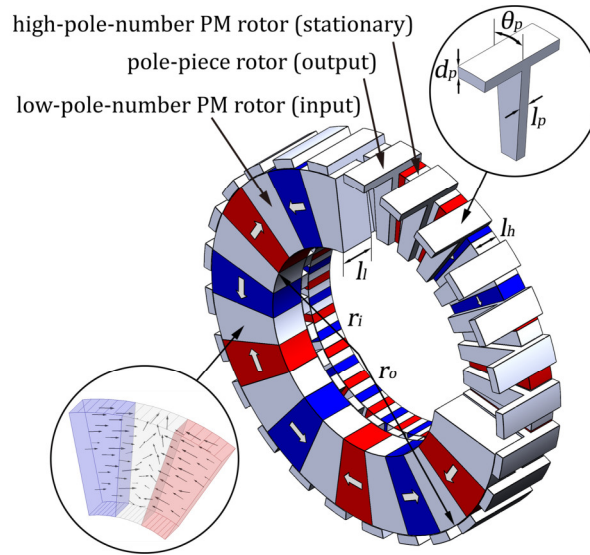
The axial transverse flux focusing magnetic gear with T-shaped pole pieces proposed in [61].
